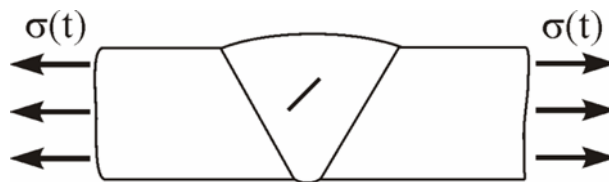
Mixed Mode loaded crack in a welded structure
